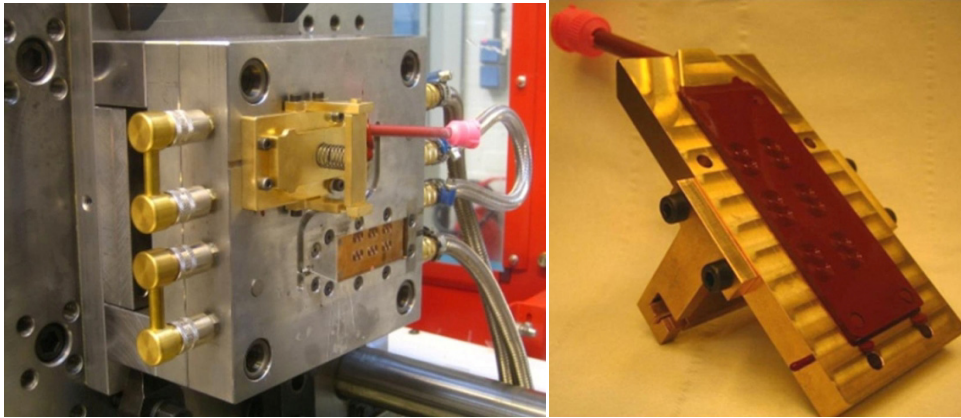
Replication mould device mounted on the injection moulding tool (left); replication mould device disassembled from the injection tool and containing the soft replica of the insert (right) [Riel-Bachmann, 2011].
